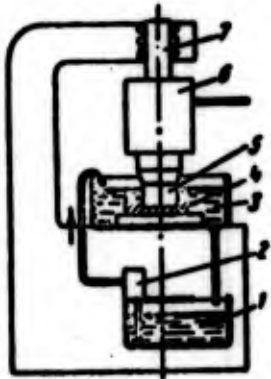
Diagram of a machine for ultrasonic treatment: 1 - tank for abrasive suspension; 2 - feed pump of abrasive suspension; 3 - bath; 4 - part to be treated; 5 - tool; 6 - magnetostrictive converter; 7 - feed system.
